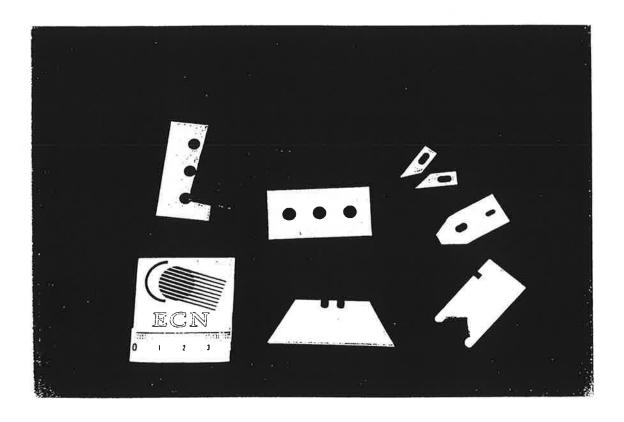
The ceramic blades manufactured by PIM method at ECN.
